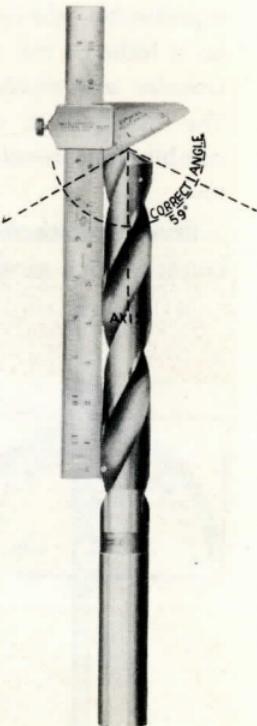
A Drill Point Gage checks both lip angle and lip length, insuring properly sharpened drills.
